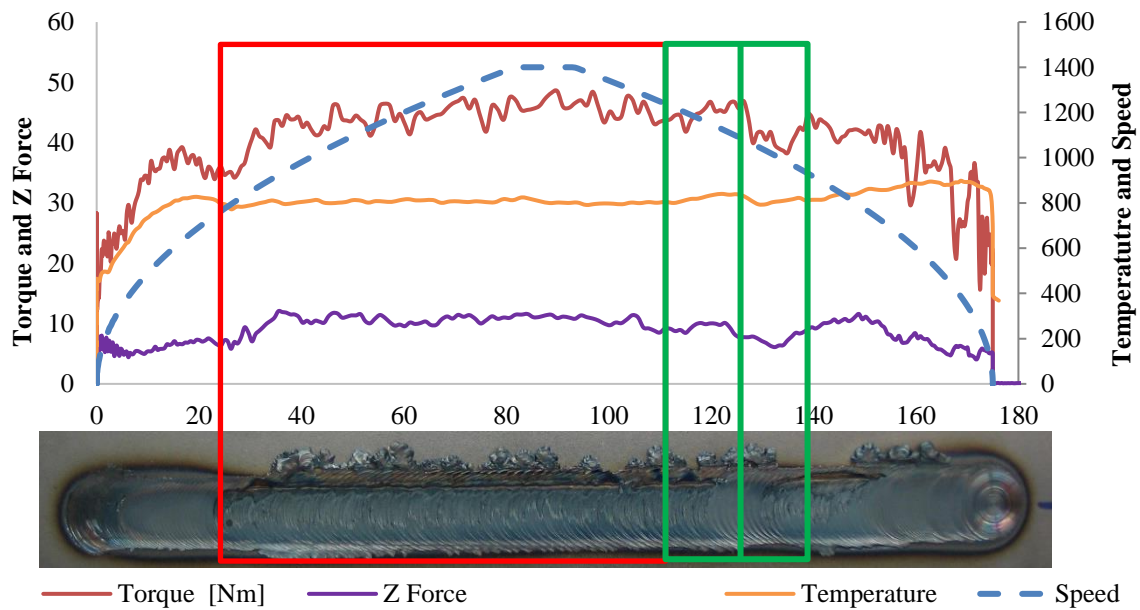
Weld produced with a PL16 tool at 1400 mm/min and 800 rpm.
